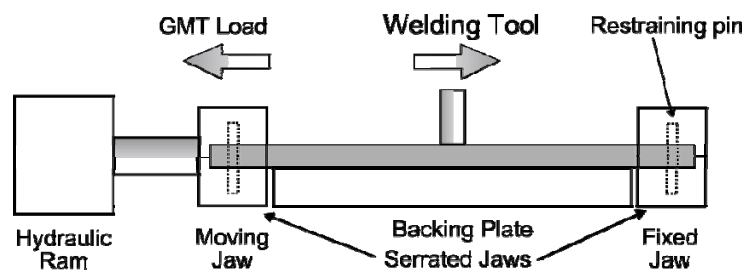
Schematic illustration of a global mechanical tensioning rig to apply tensile loads to the plates either during welding (SGMT) or after welding is complete (PWGMT). The plates are mounted in serrated and hardened jaws with hydraulic rams attached to one jaw to apply a tensile load. Slipping is further restricted by pins/bolts in each grip passing through pre-machined holes in the plates (after Price 2007).
